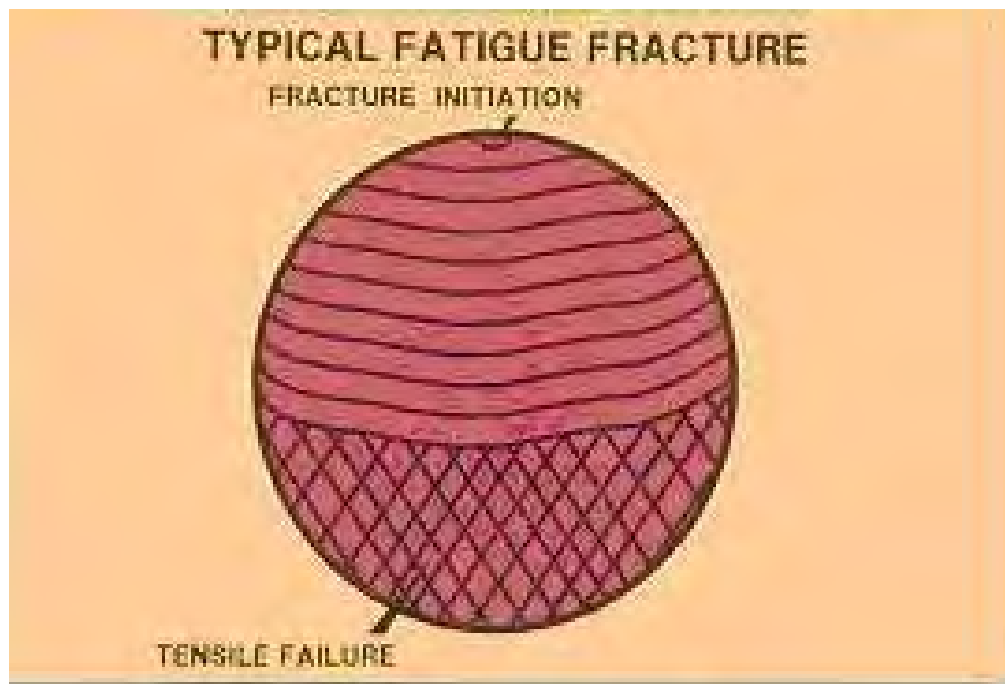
Schematic of a fatigue fracture surface showing “beach marks.”
